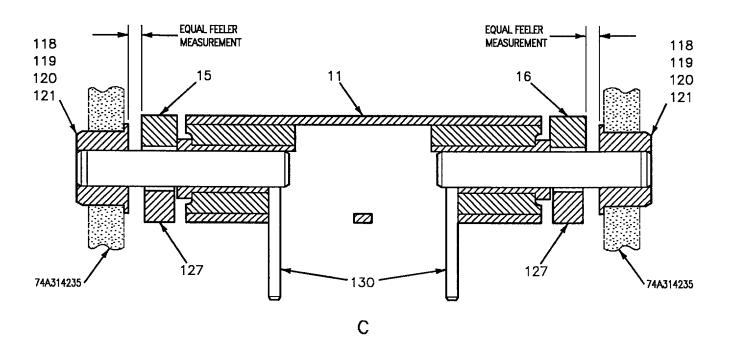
Tool Installation and Alignment Check (Sheet 2)
